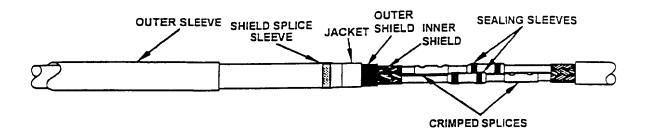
Double Shield Cable Repair with Mini-Seal Crimp Primary Splice (Sheet 1 of 3)
